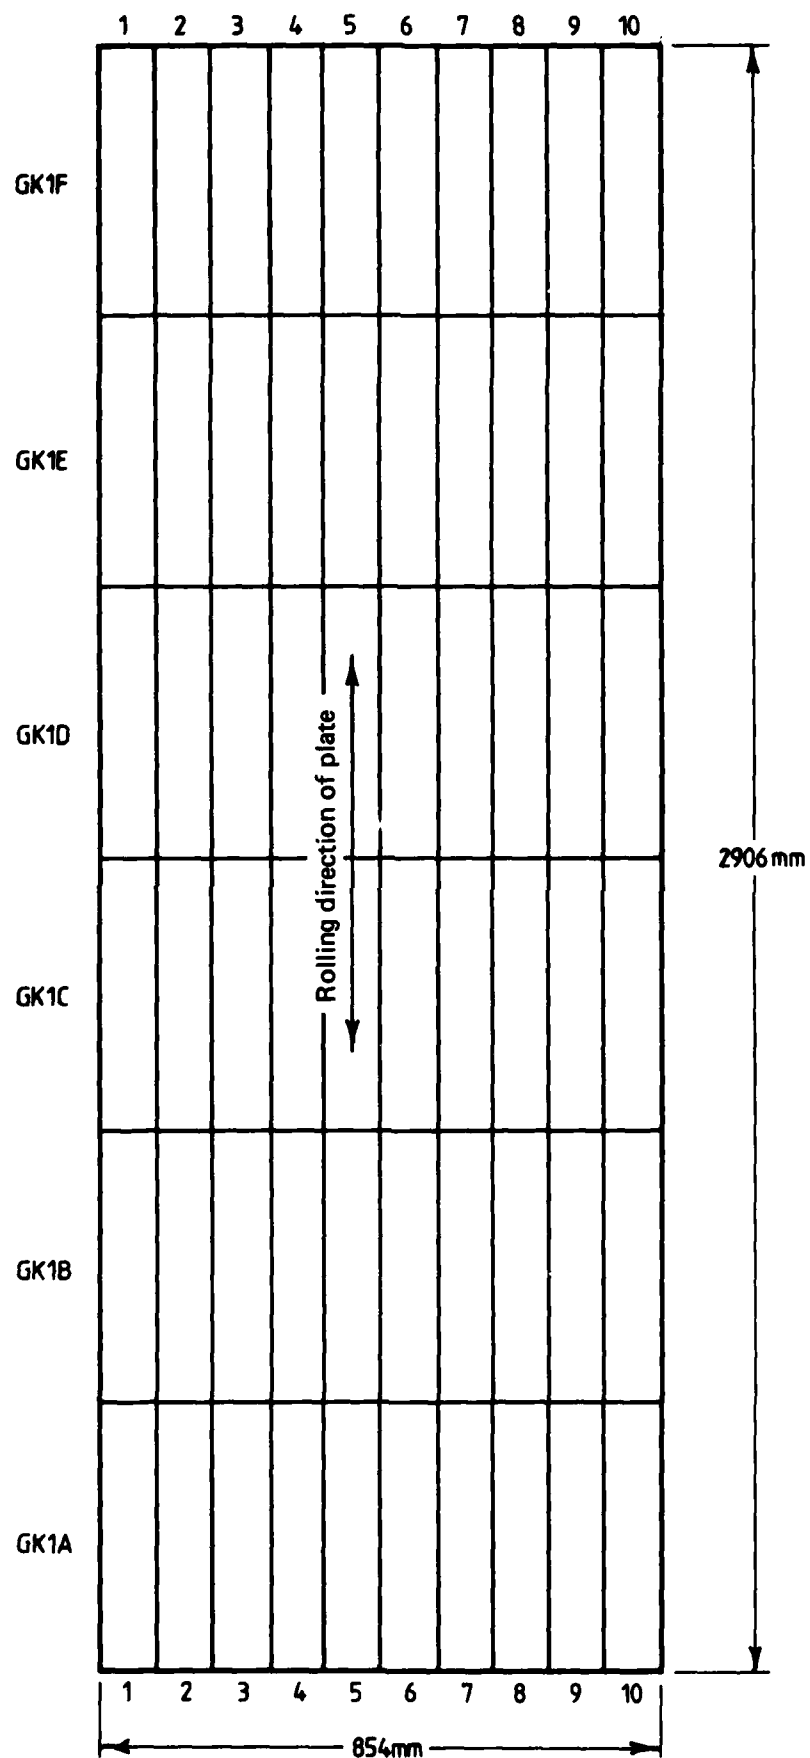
FATIGUE SPECIMEN POSITIONS IN A7- U4SG PLATE
